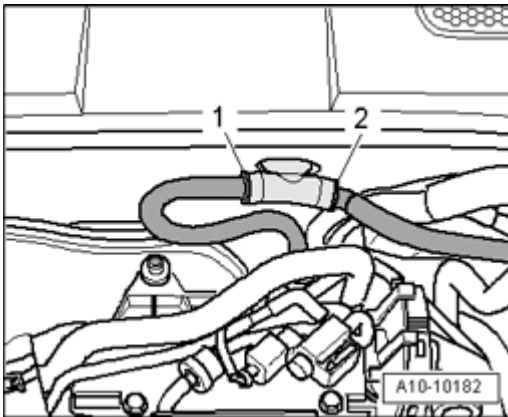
Removing Vacuum Hoses From T-Piece On Bulkhead
